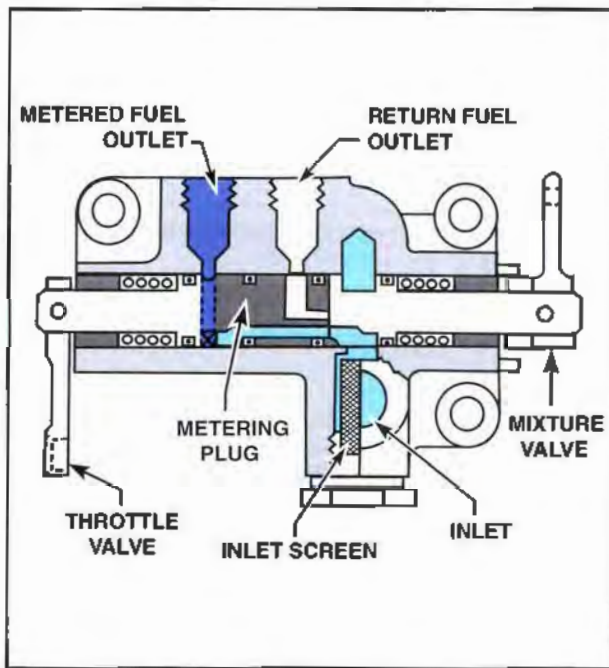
The fuel control assembly contains the manual mixture control valve and fuel metering valve. Both are rotary valves connected to cockpit control levers.
